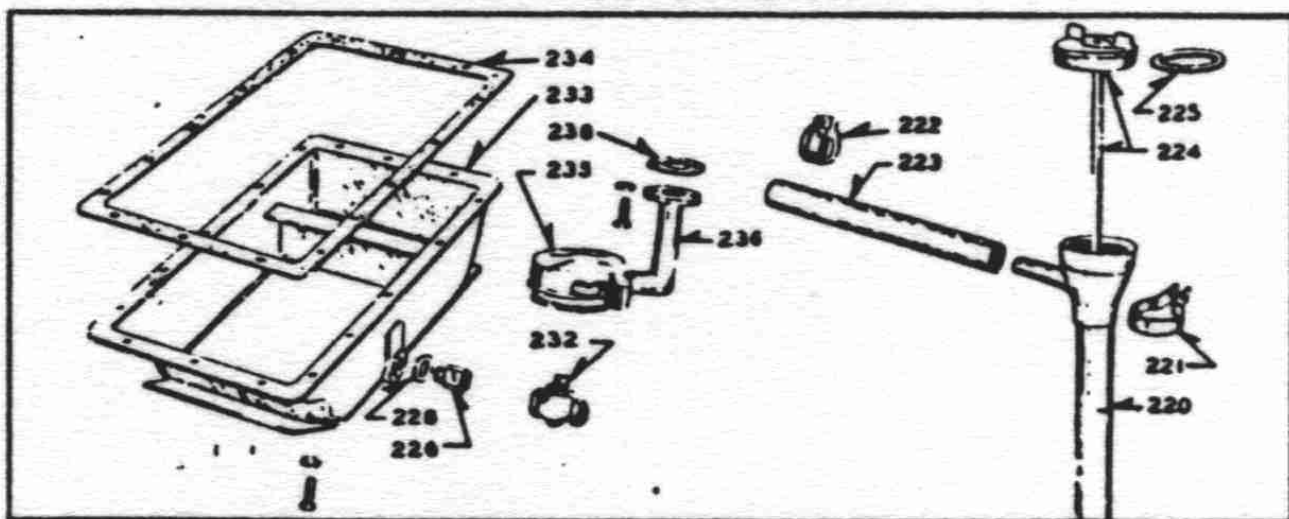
OIL PAN AND FILLER TUBE GROUP
